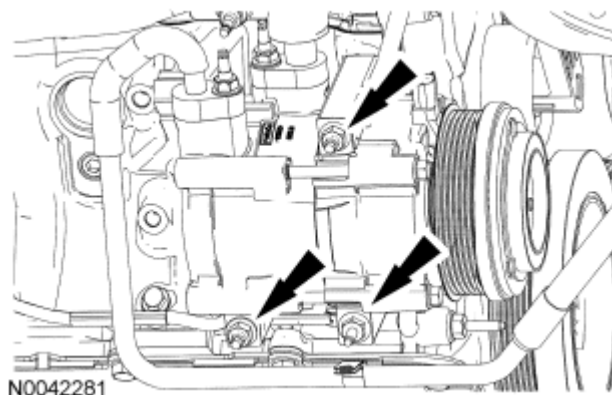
Locating Stud Bolt, A/C Compressor And Nuts
